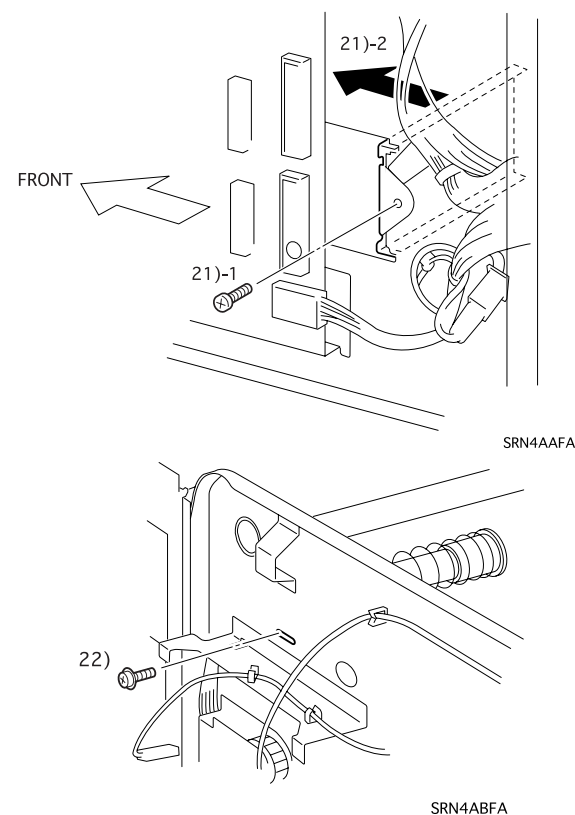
2ND BTR CAM ASSEMBLY Removal
